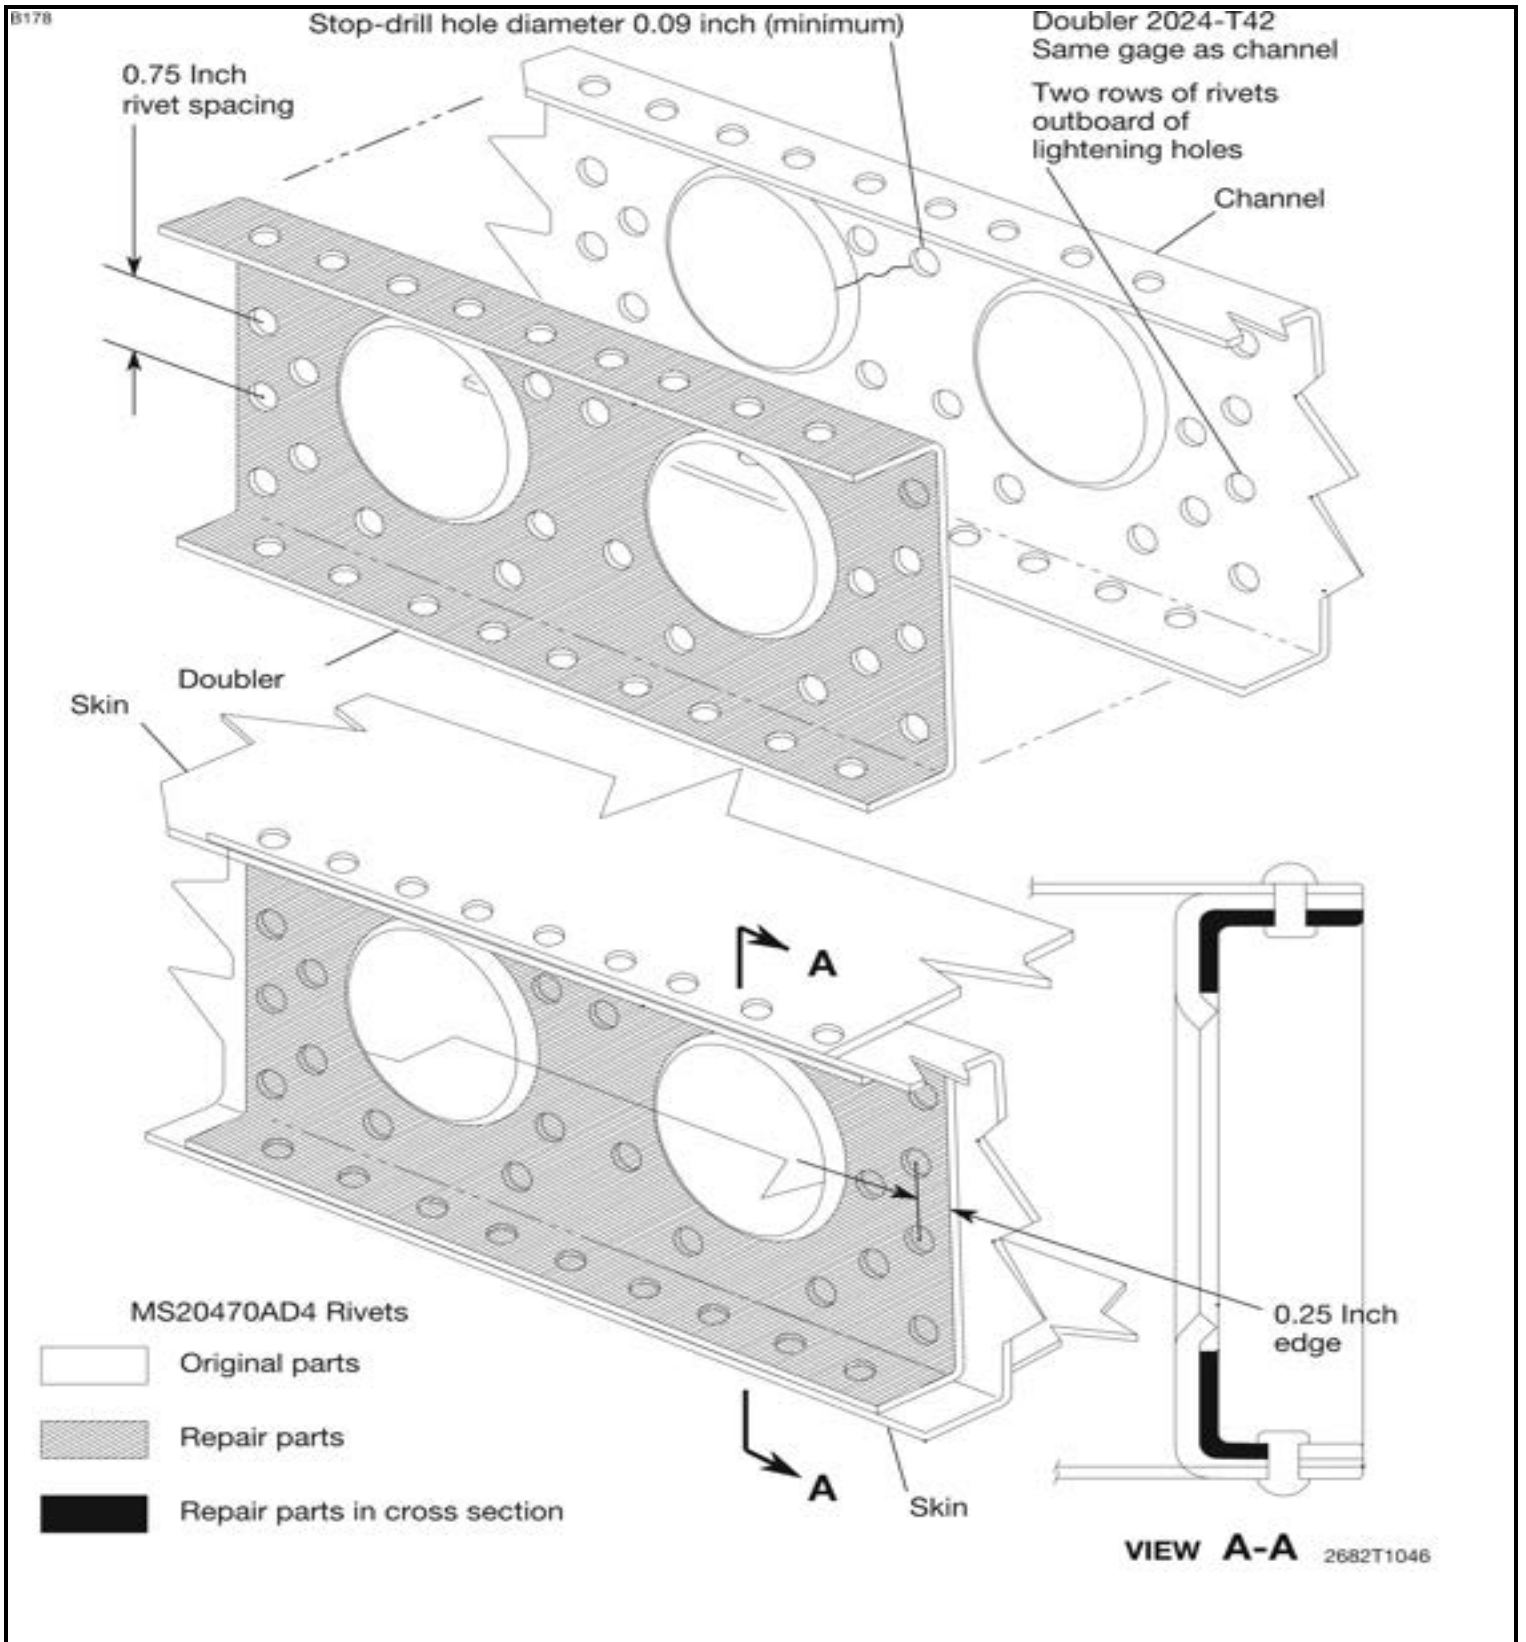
Sheet 4 : Typical Stringer and Channel Repair
